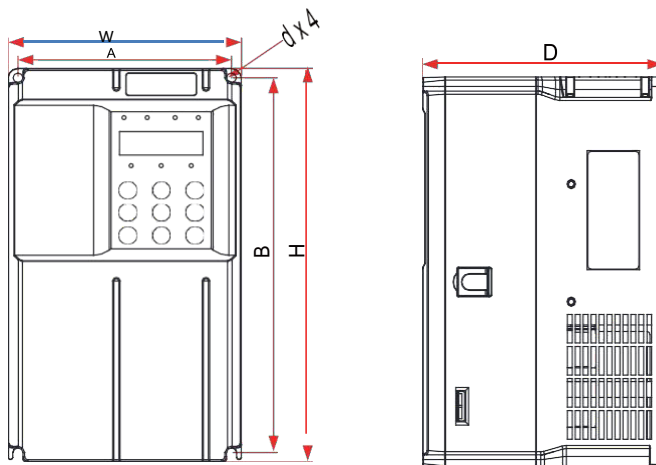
Schematic diagram of A600 appearance dimensions and installation dimensions
